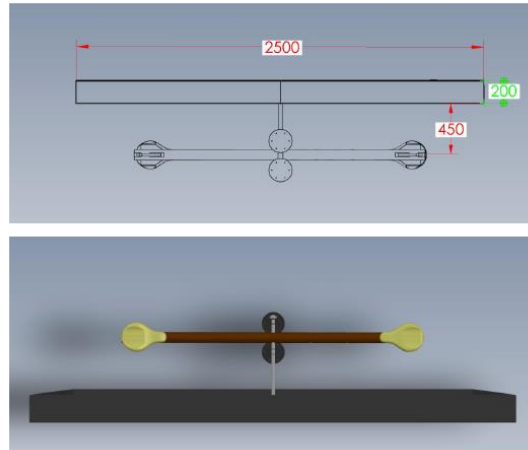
Top View of Seesaw with Gear Wheels (All dimensions are in mm.)
